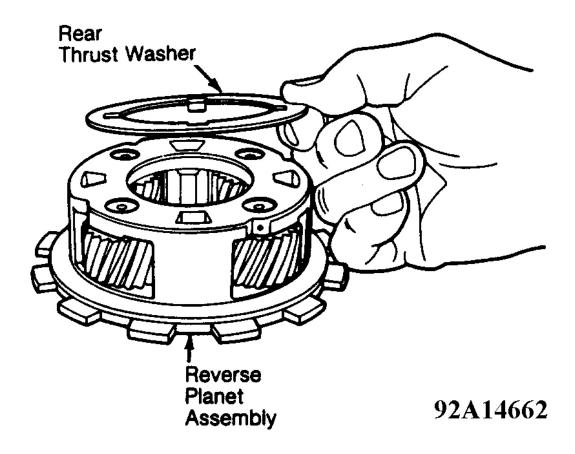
Removing Reverse Planet Assembly Courtesy of FORD MOTOR CO.
